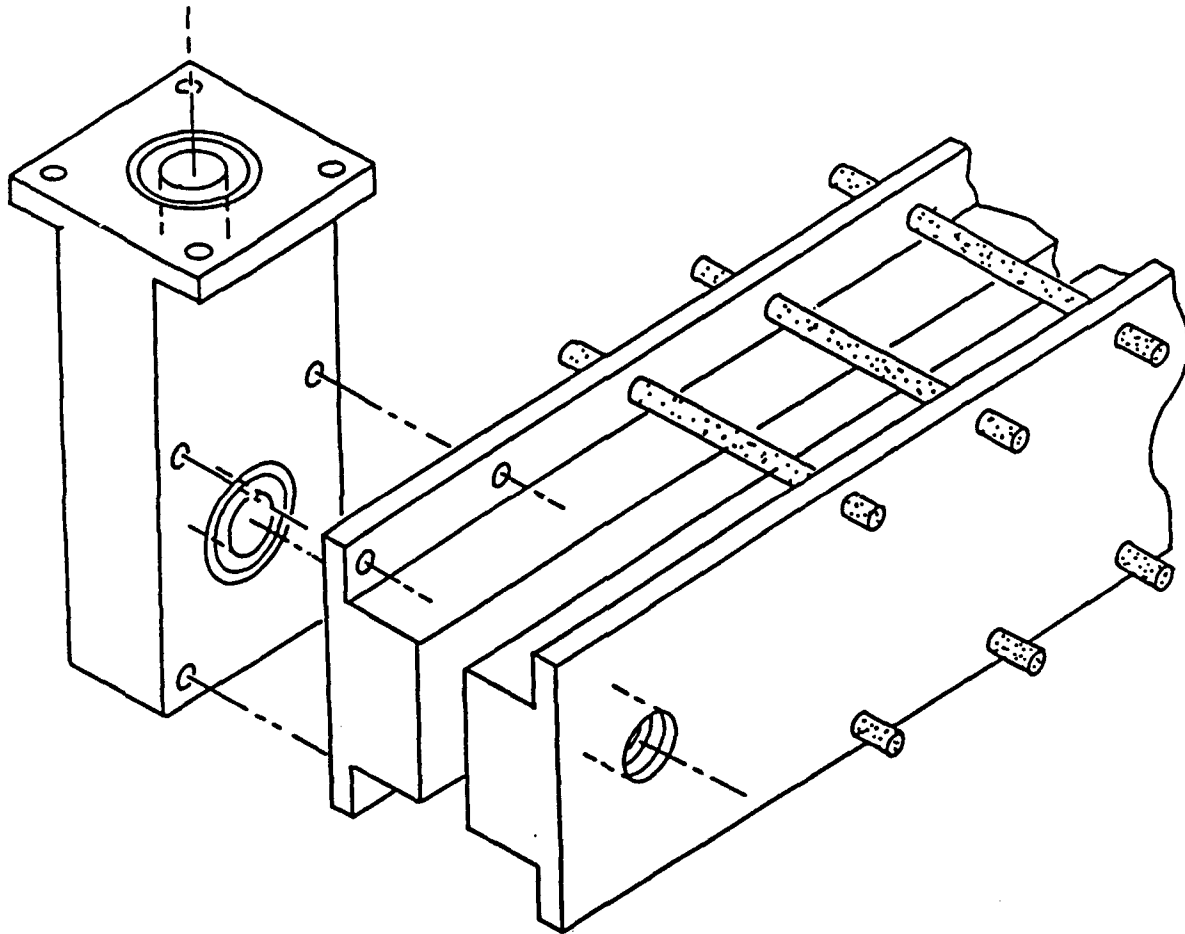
Exploded-view sketch of water-cooled electrode holder assembly
